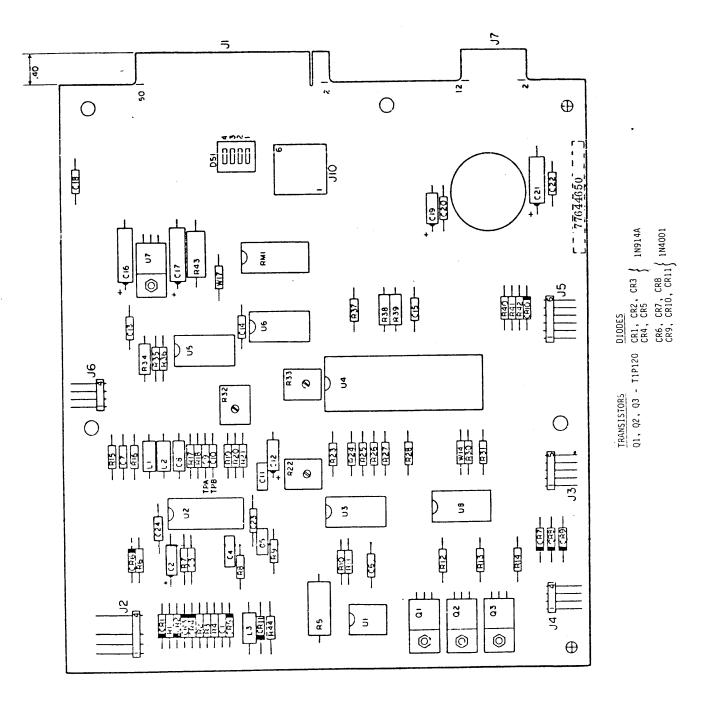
B, Assembly and Parts List (PWA 77644650)
